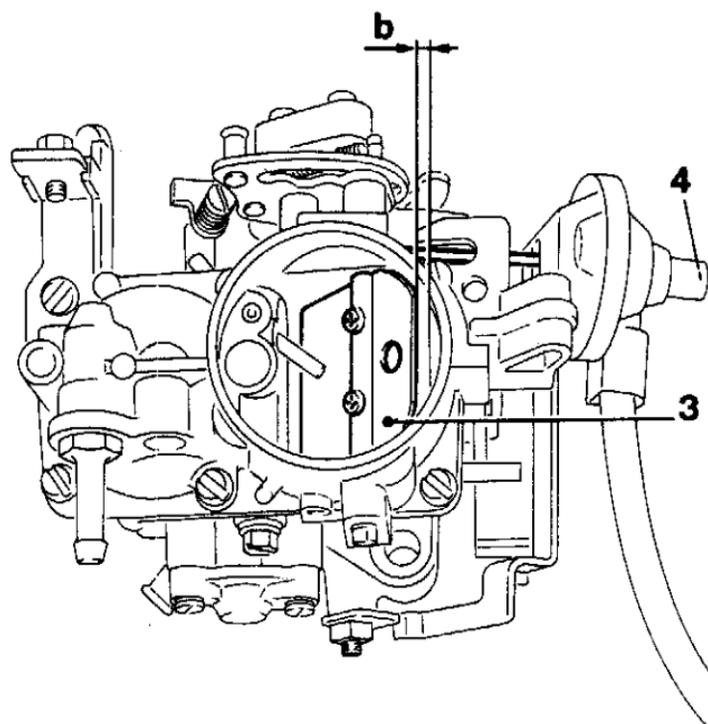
Choke vacuum pull-down adjustment (Sec 4)
